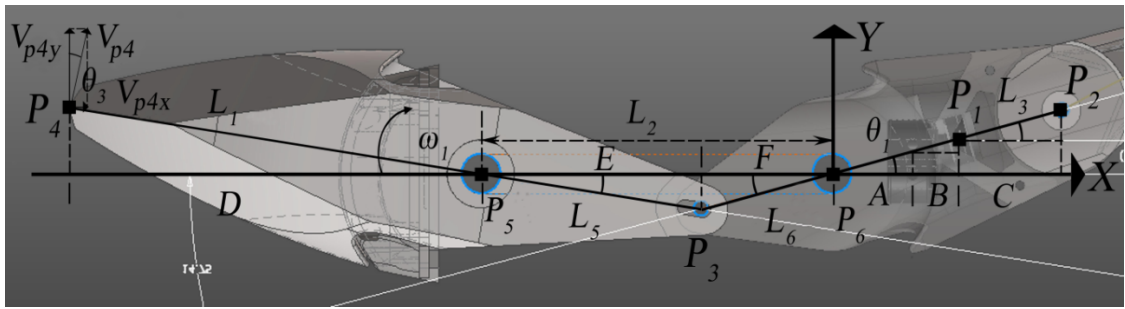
Schematic drawing of the offset drive crank and linkages;
